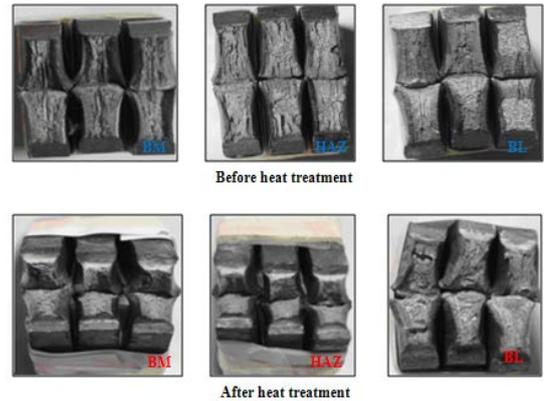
Fracture surfaces from Charpy-V-notch (CVN) testing
